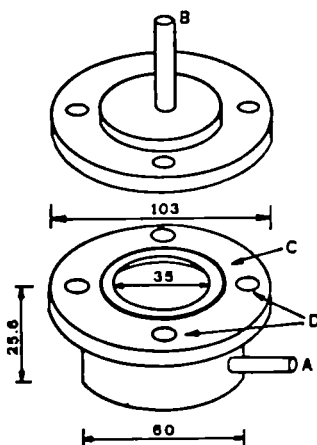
Exploded view of the membrane microreactor : A - feed inlet; B - medium outlet; C - O-ring; D - butterfly screw holes. All dimensions are in mm.
